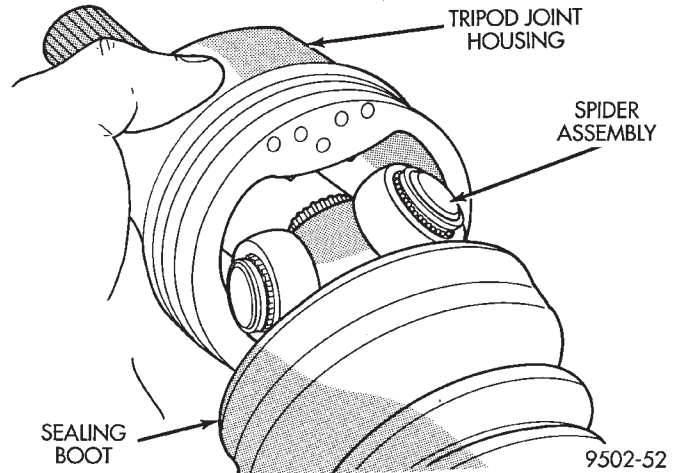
Spider Assembly Removal from Tripod Joint Housing
